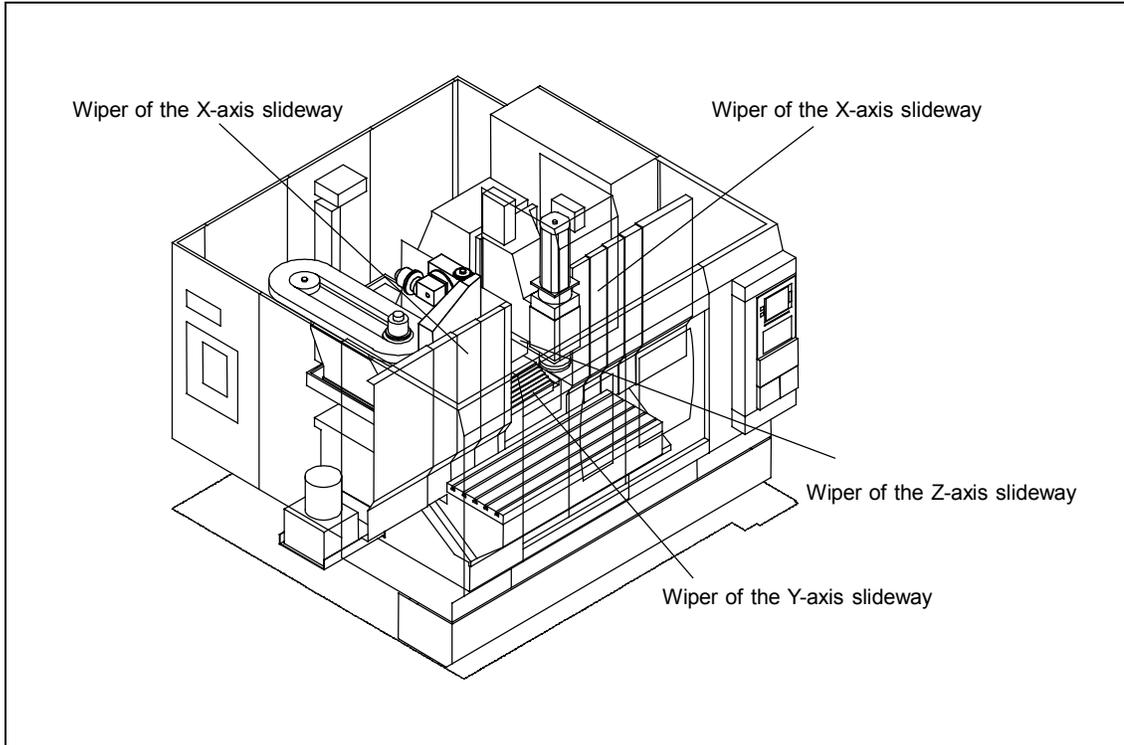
Checking the Wiper at the X-axis Slidaway Cover
